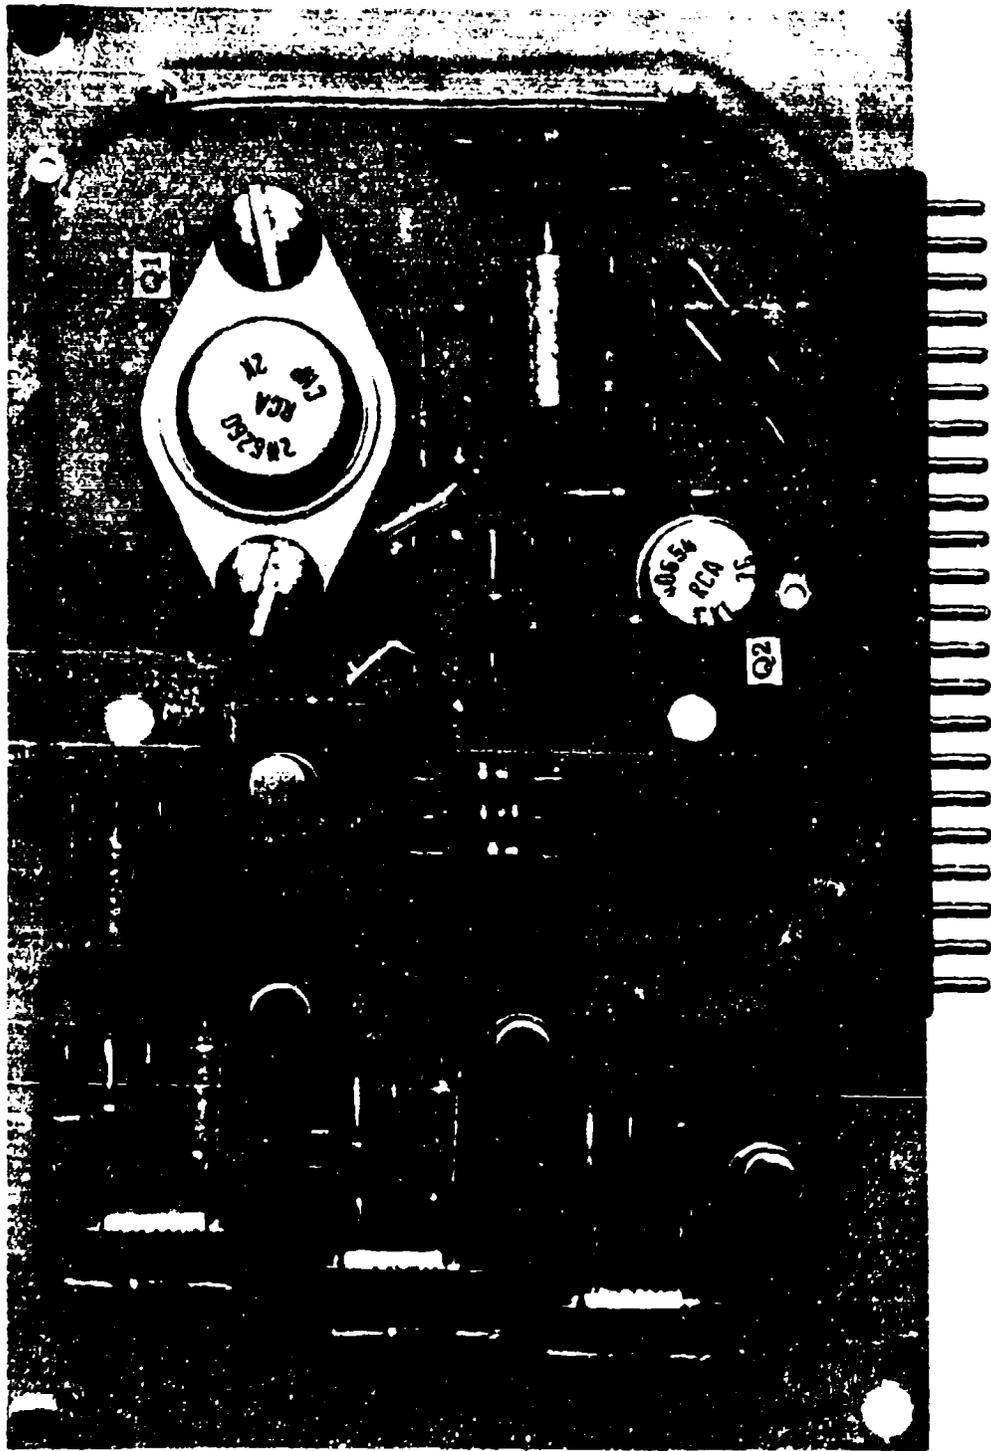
TOP VIEW OF MODEL CD-B PRINTED CIRCUIT BOARD
